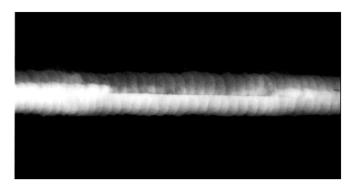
X-Ray Pipeline Weld with Defect of Incomplete fusion.
